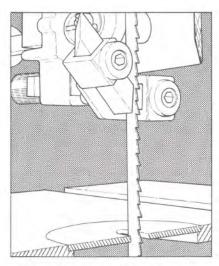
Turn the adjusting knob until the front edges of the guide blocks are just short of the bottom of the gullets between the teeth, as shown
